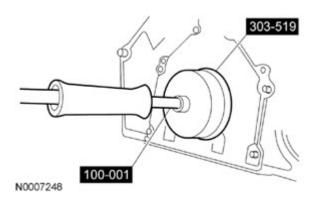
Removing Crankshaft Rear Oil Seal Slinger Using Special Tools Courtesy of FORD MOTOR CO.
